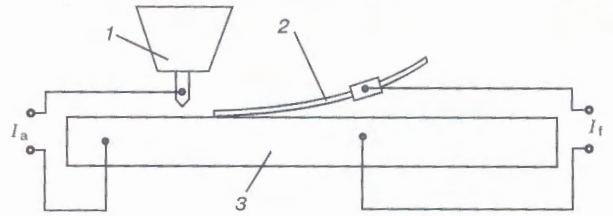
Scheme of non-consumable electrode argon-arc welding with a current passing through filler: 1 - welding torch; 2 - filler wire; 3 - workpiece; I_a , I_f - current passing through arc gap and filler, respectively
